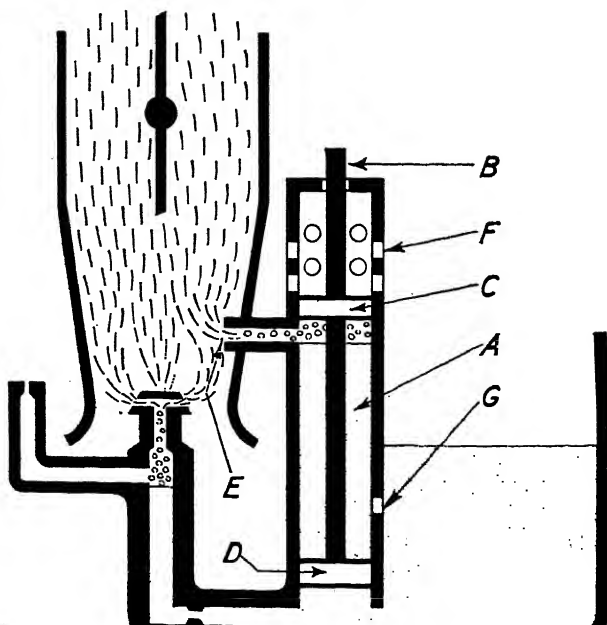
ACCELERATING PUMP WITH LEATHER PISTON AND CHECK VALVE
